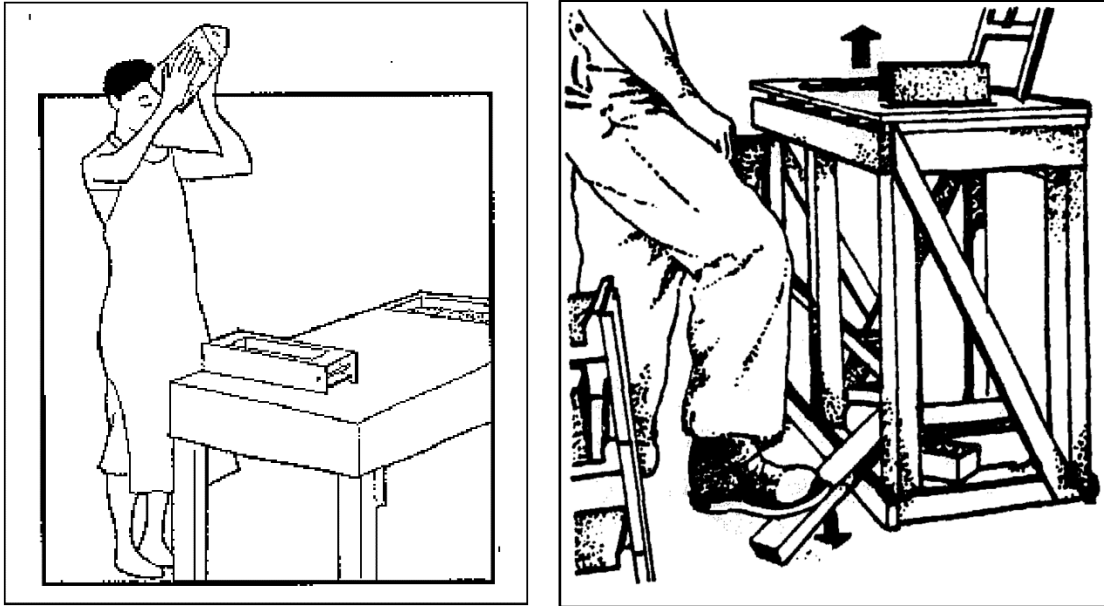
(a¹⁸ & b¹⁹): Manual moulding on moulding table
